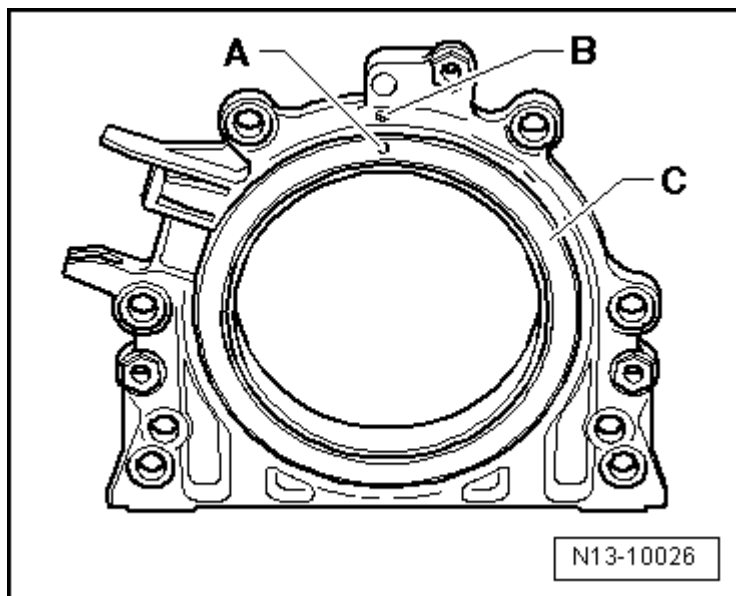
Locating Pin On Sensor Wheel Aligns With Marking On Sealing Flange
